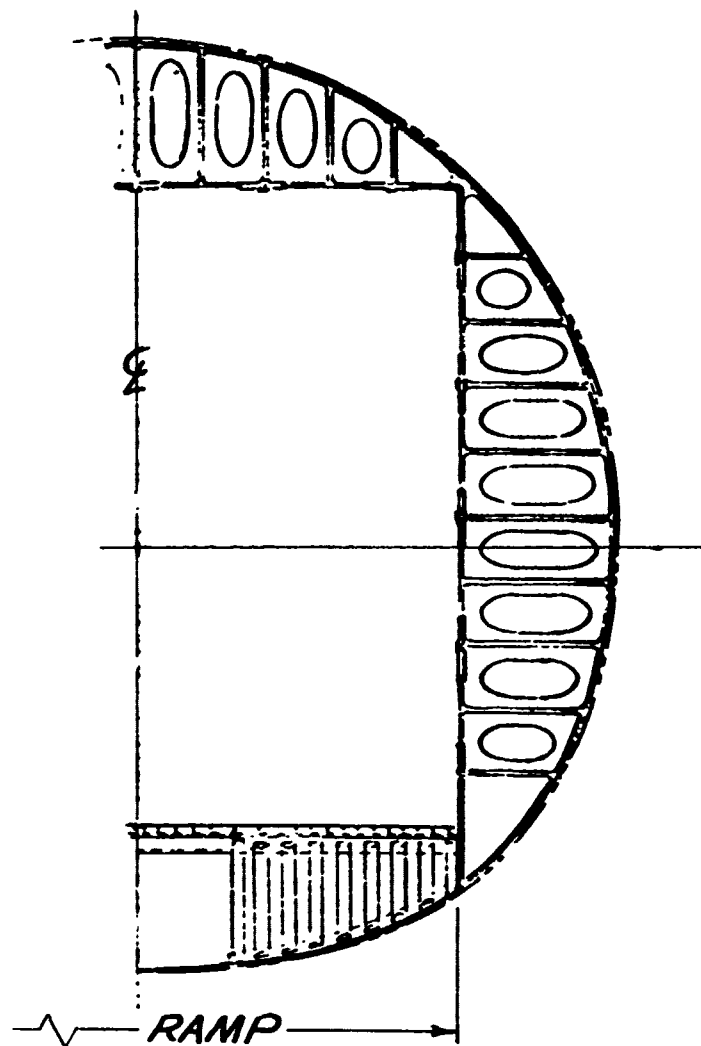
AFT SECTION FRAME AND RAMP CROSS SECTION
